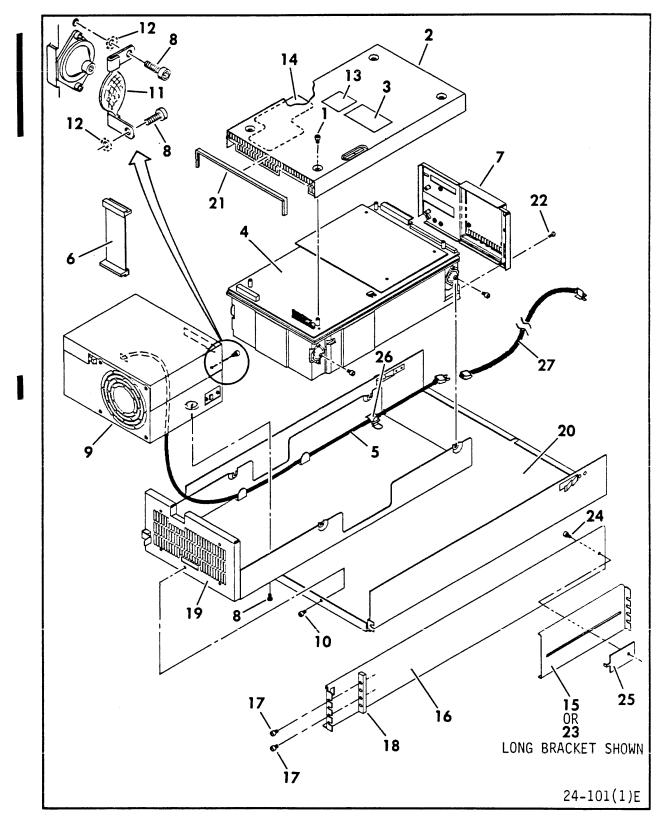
Eight-Inch Module Drive (Sheet 1 of 4)
